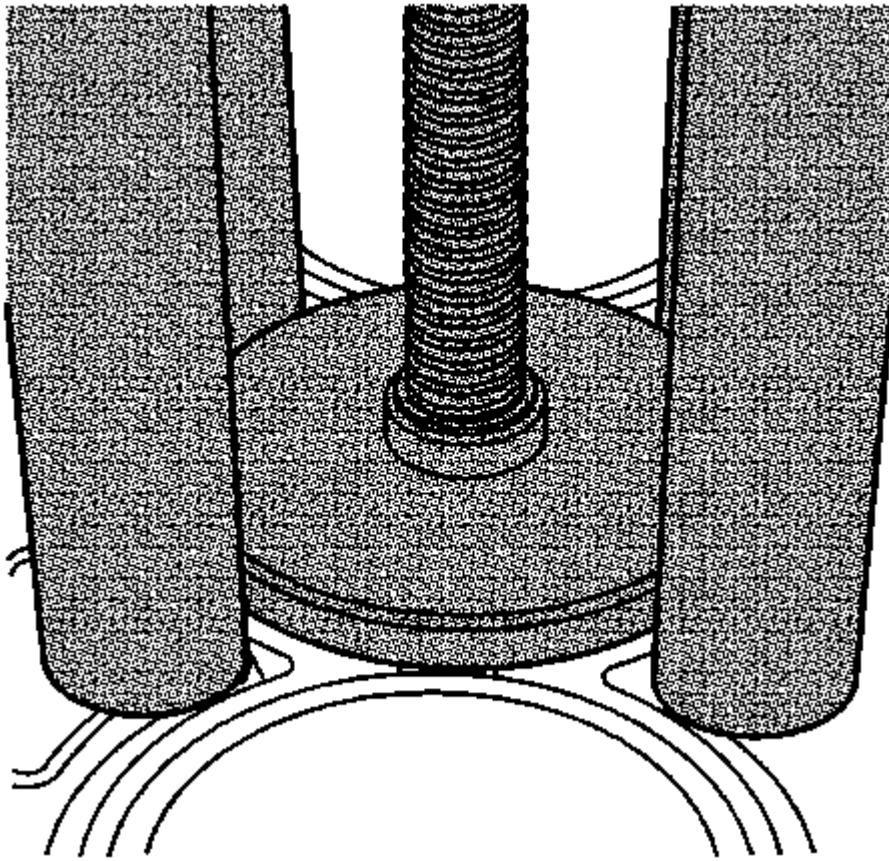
Seating Cylinder Bore Sleeve Completely Using Tool
